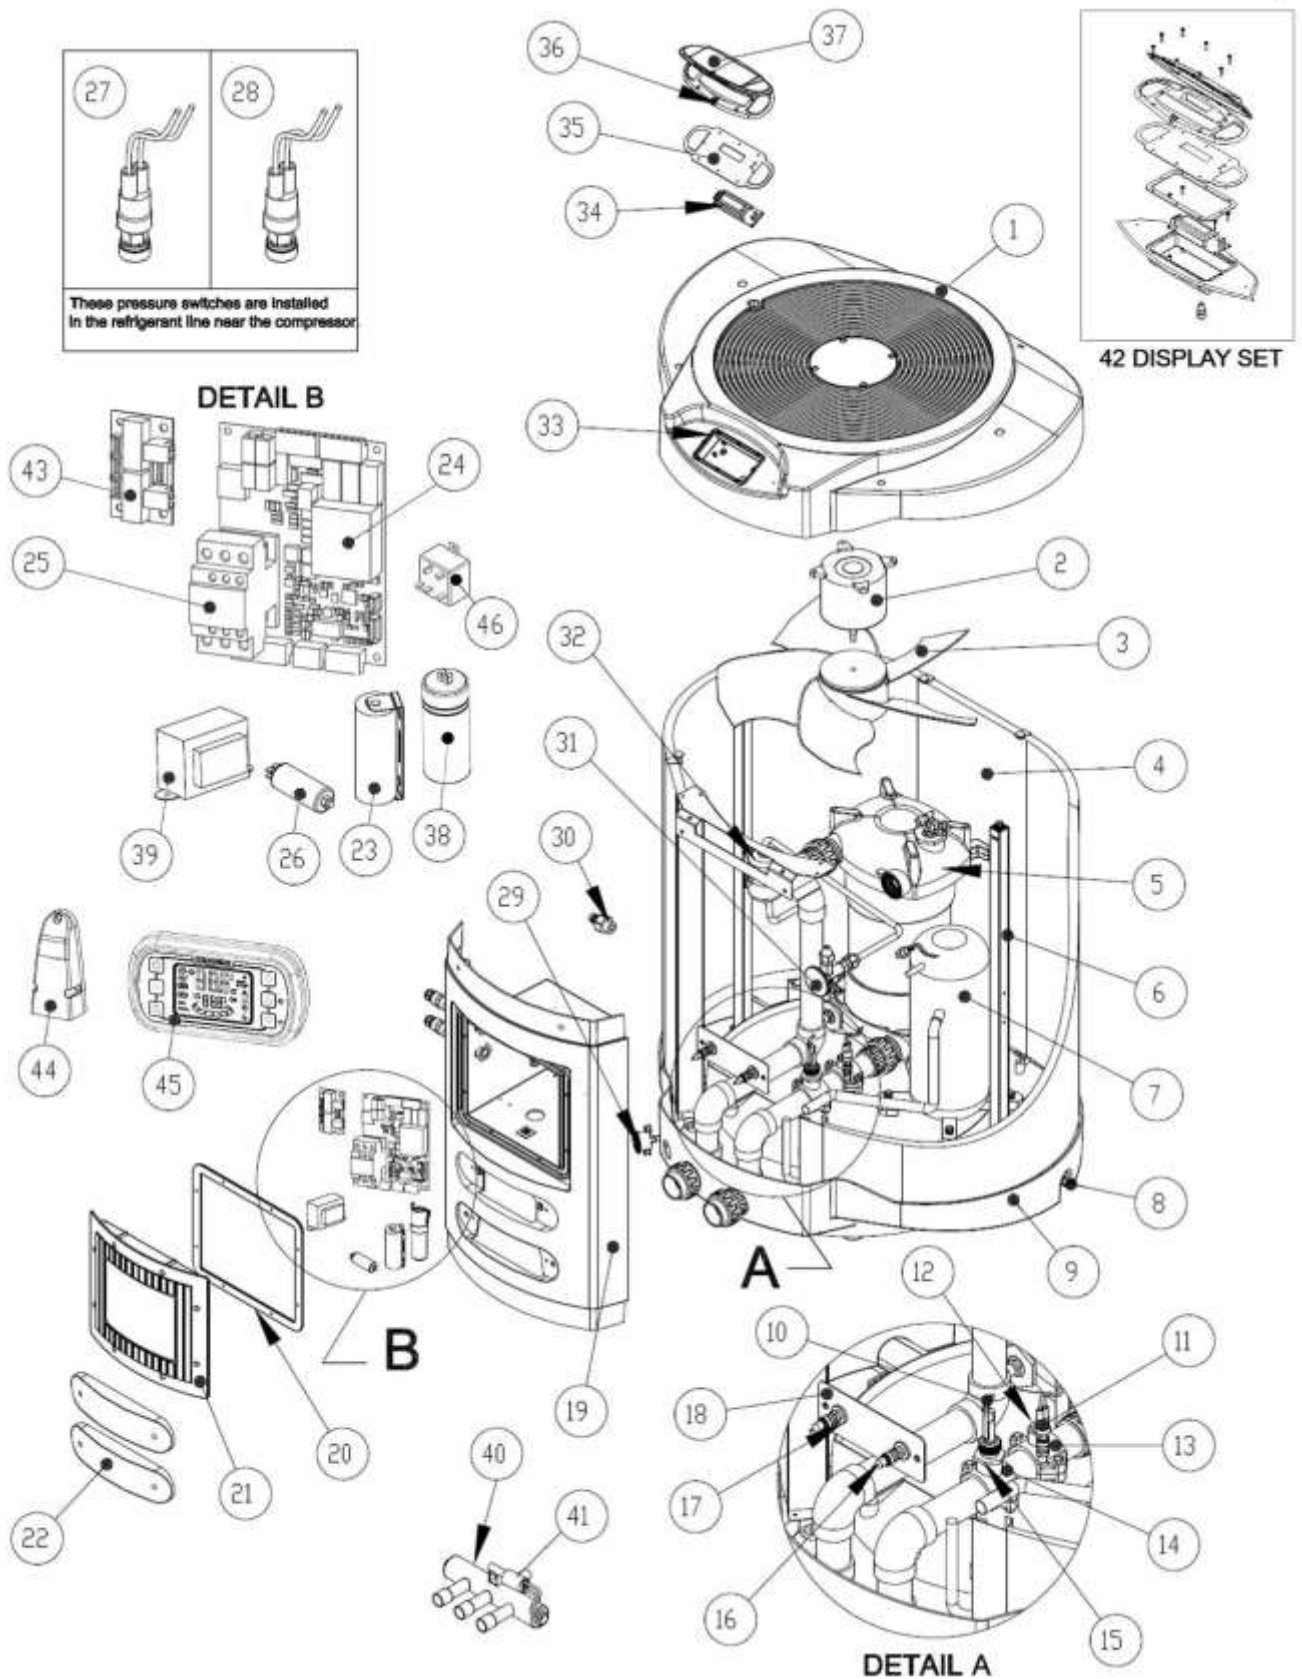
AstralpoolHeat Heat Pump Exploded View.
